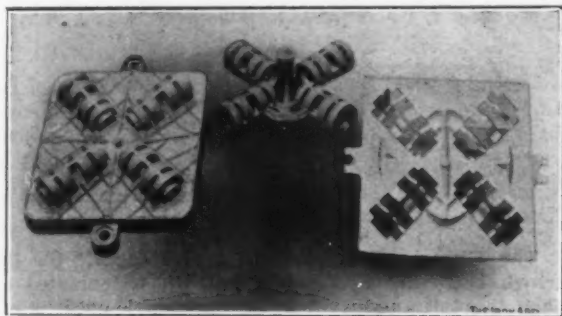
Stripping Plate Which Is Also Part of Pattern and Core Print.
